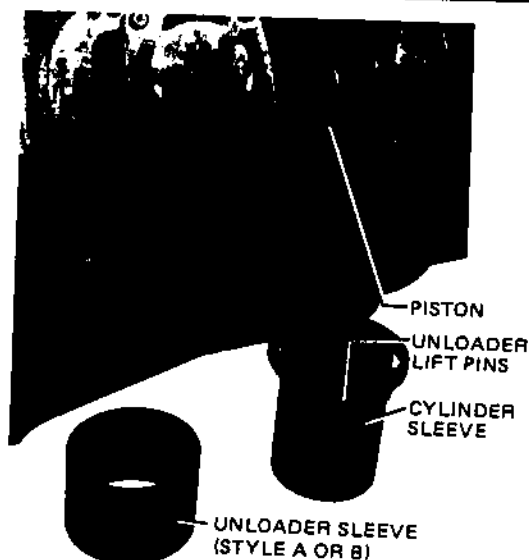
CYLINDER SLEEVE AND UNLOADER SLEEVE
